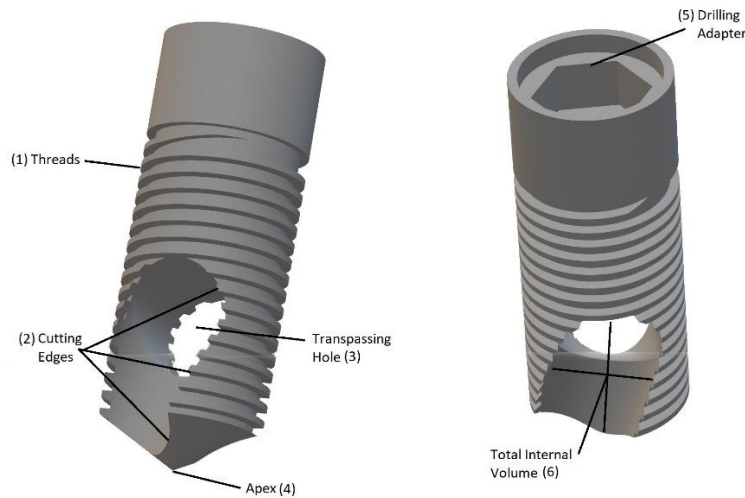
BKS innovative Simple Machine: (1) Screw thread; (2) adding angles and cutting grooves; (3) Trespassing hole connecting flutes; (4) Apex; (5) Drilling or spanner adapter for insertion torque; (6) Inner volume.
